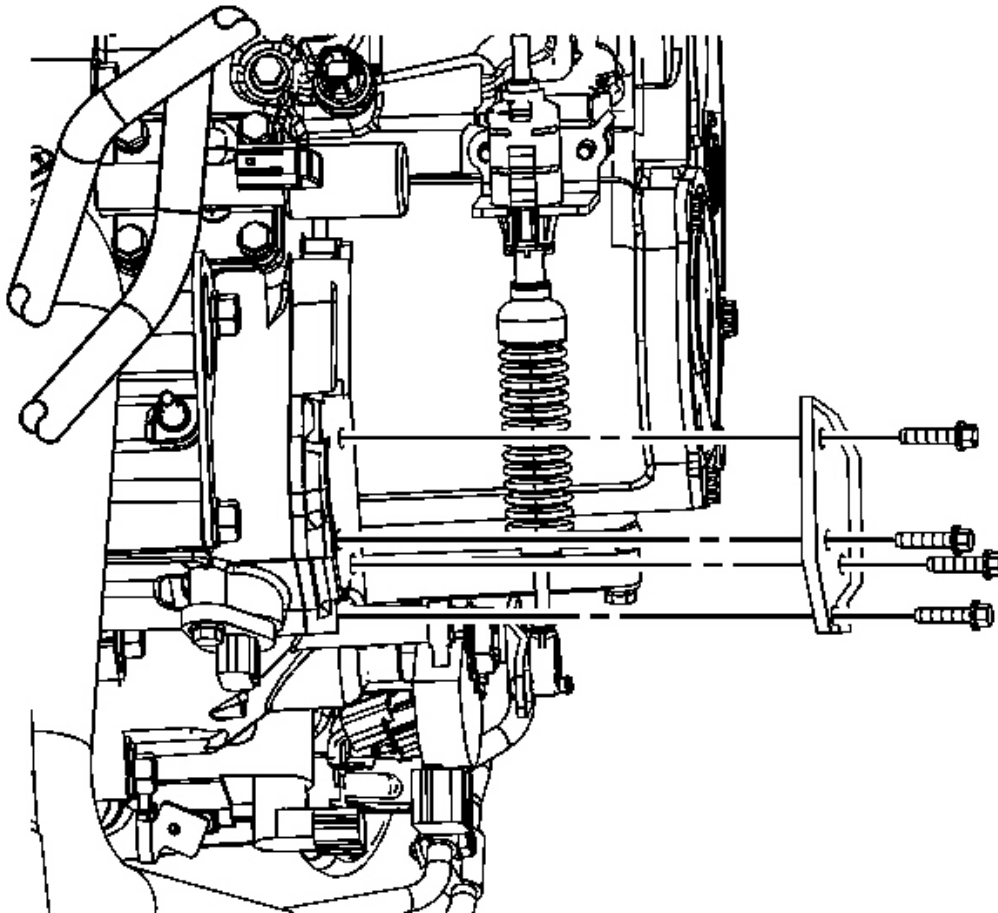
Solenoid Assembly Cover, Gasket & Bolts Removed
